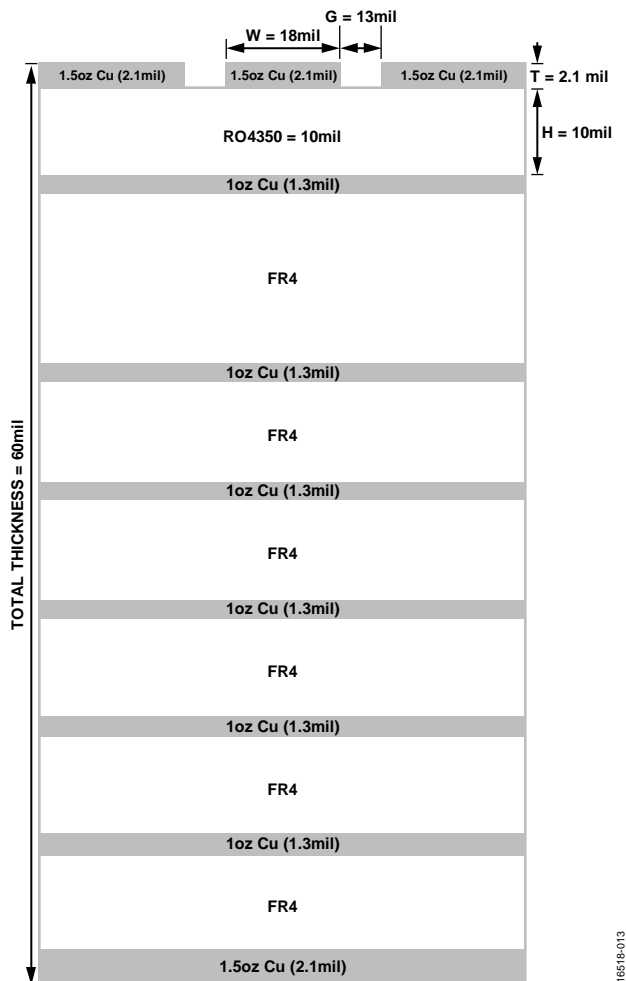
[ADRF5160-EVALZ](#) Evaluation Board Cross Sectional View
